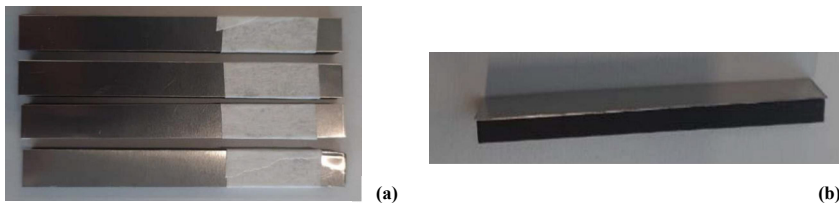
(a) CFRP- metal sandwiched workpieces (b) 48 CFRP - Metal sandwich workpiece side view
